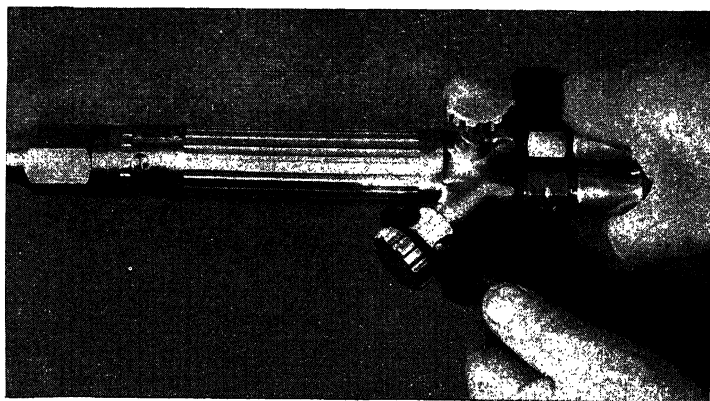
Fastening welding barrel to hose. (*Courtesy of Linde Air Products Co.*)
